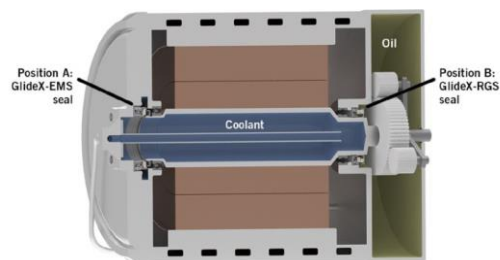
An example of shaft seal in Rotor cooling system⁶⁾
